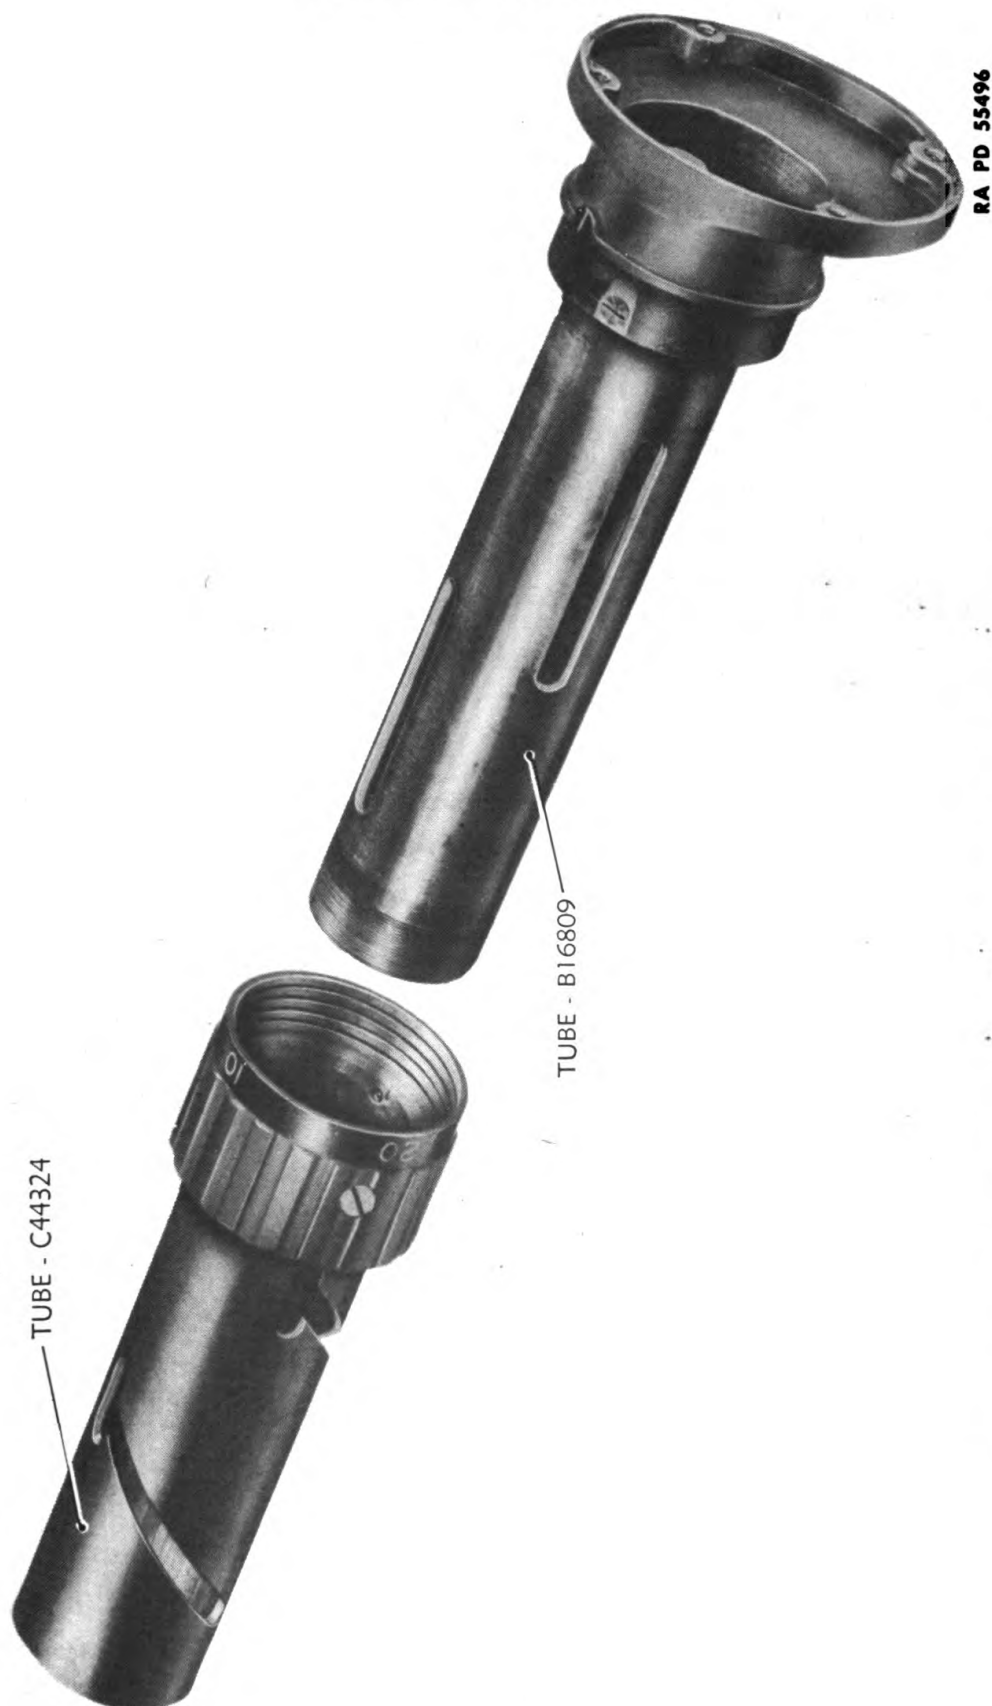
Telescope M3—Removal Of Erector Lens Tube From Cam Tube
